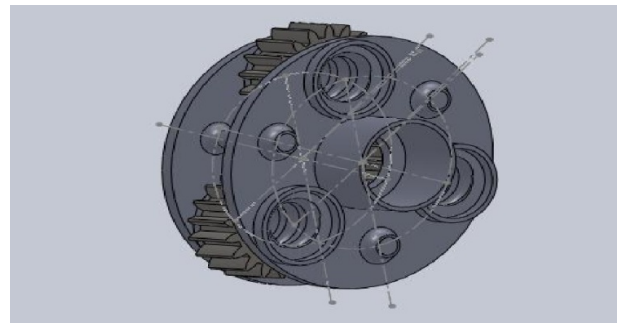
Cross-sectional view of Spring Gear Assembly
